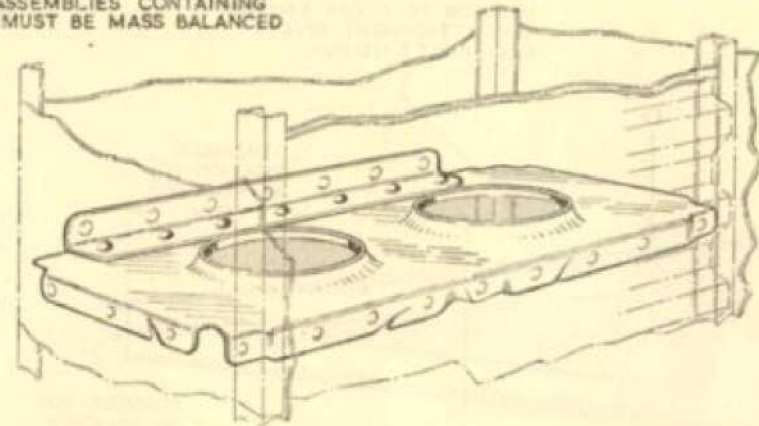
Method of repairing cracked flanges in lightening holes
